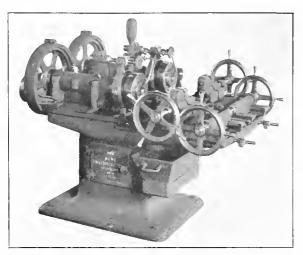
1¹2-Inch Double Bolt Cutter. Can be fitted with holders for threading pipe nippers Acme Machinery Co.
